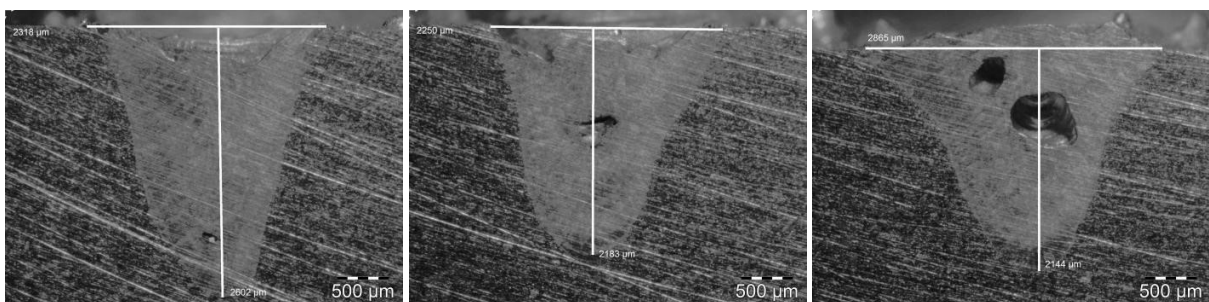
Laser weld seam of AlMg3 using a 0.4 mm optical fiber, P=2kW, v= 3 m/min, from left to right: F= 0, -1 and -2 mm, respectively.
